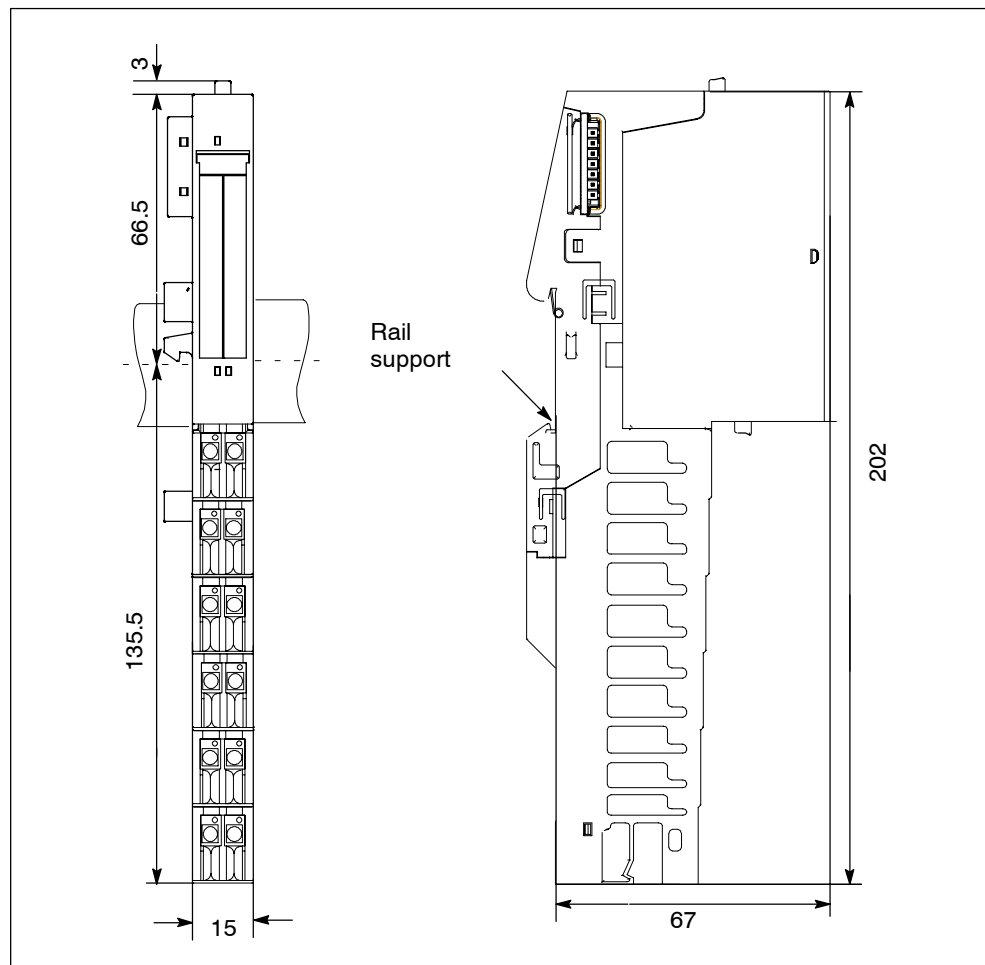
Dimensioned drawing of terminal modules (Fast Connect) with an electronic module inserted
